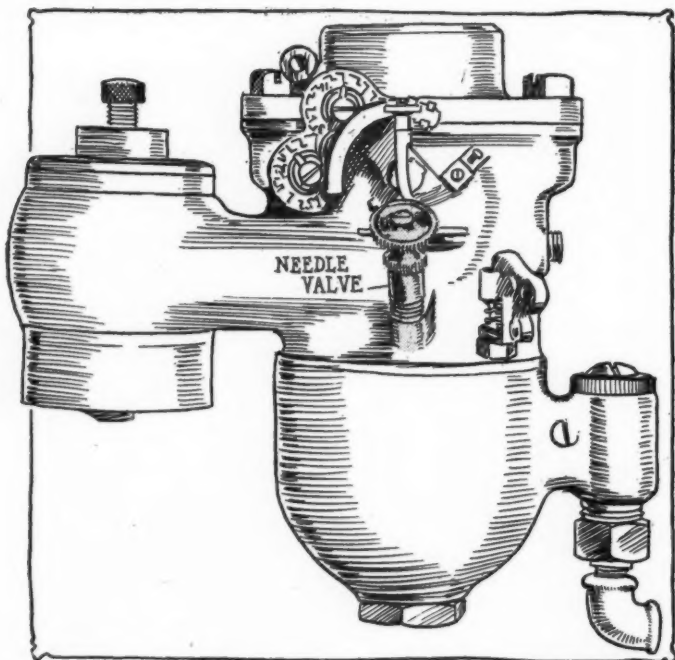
Location of the needle valve on the Schebler L, Carburetor
